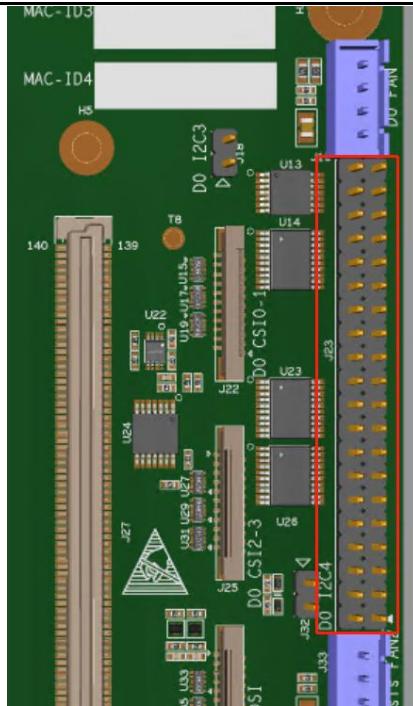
EBC7702 Carrier board 40 PIN Header
